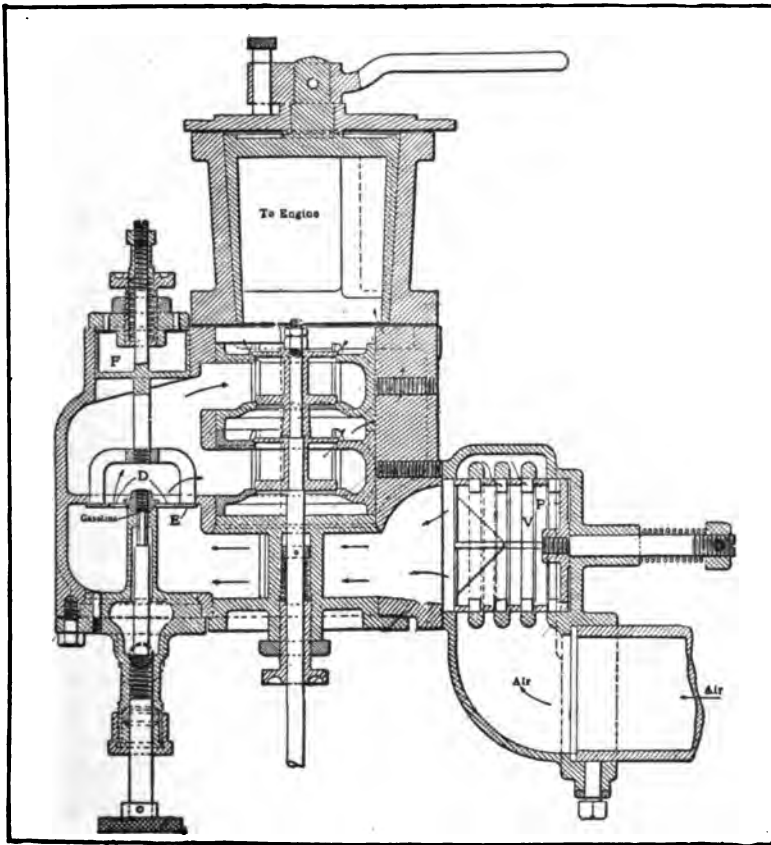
Gasoline vaporizer used on I. H. C. gas engines.
